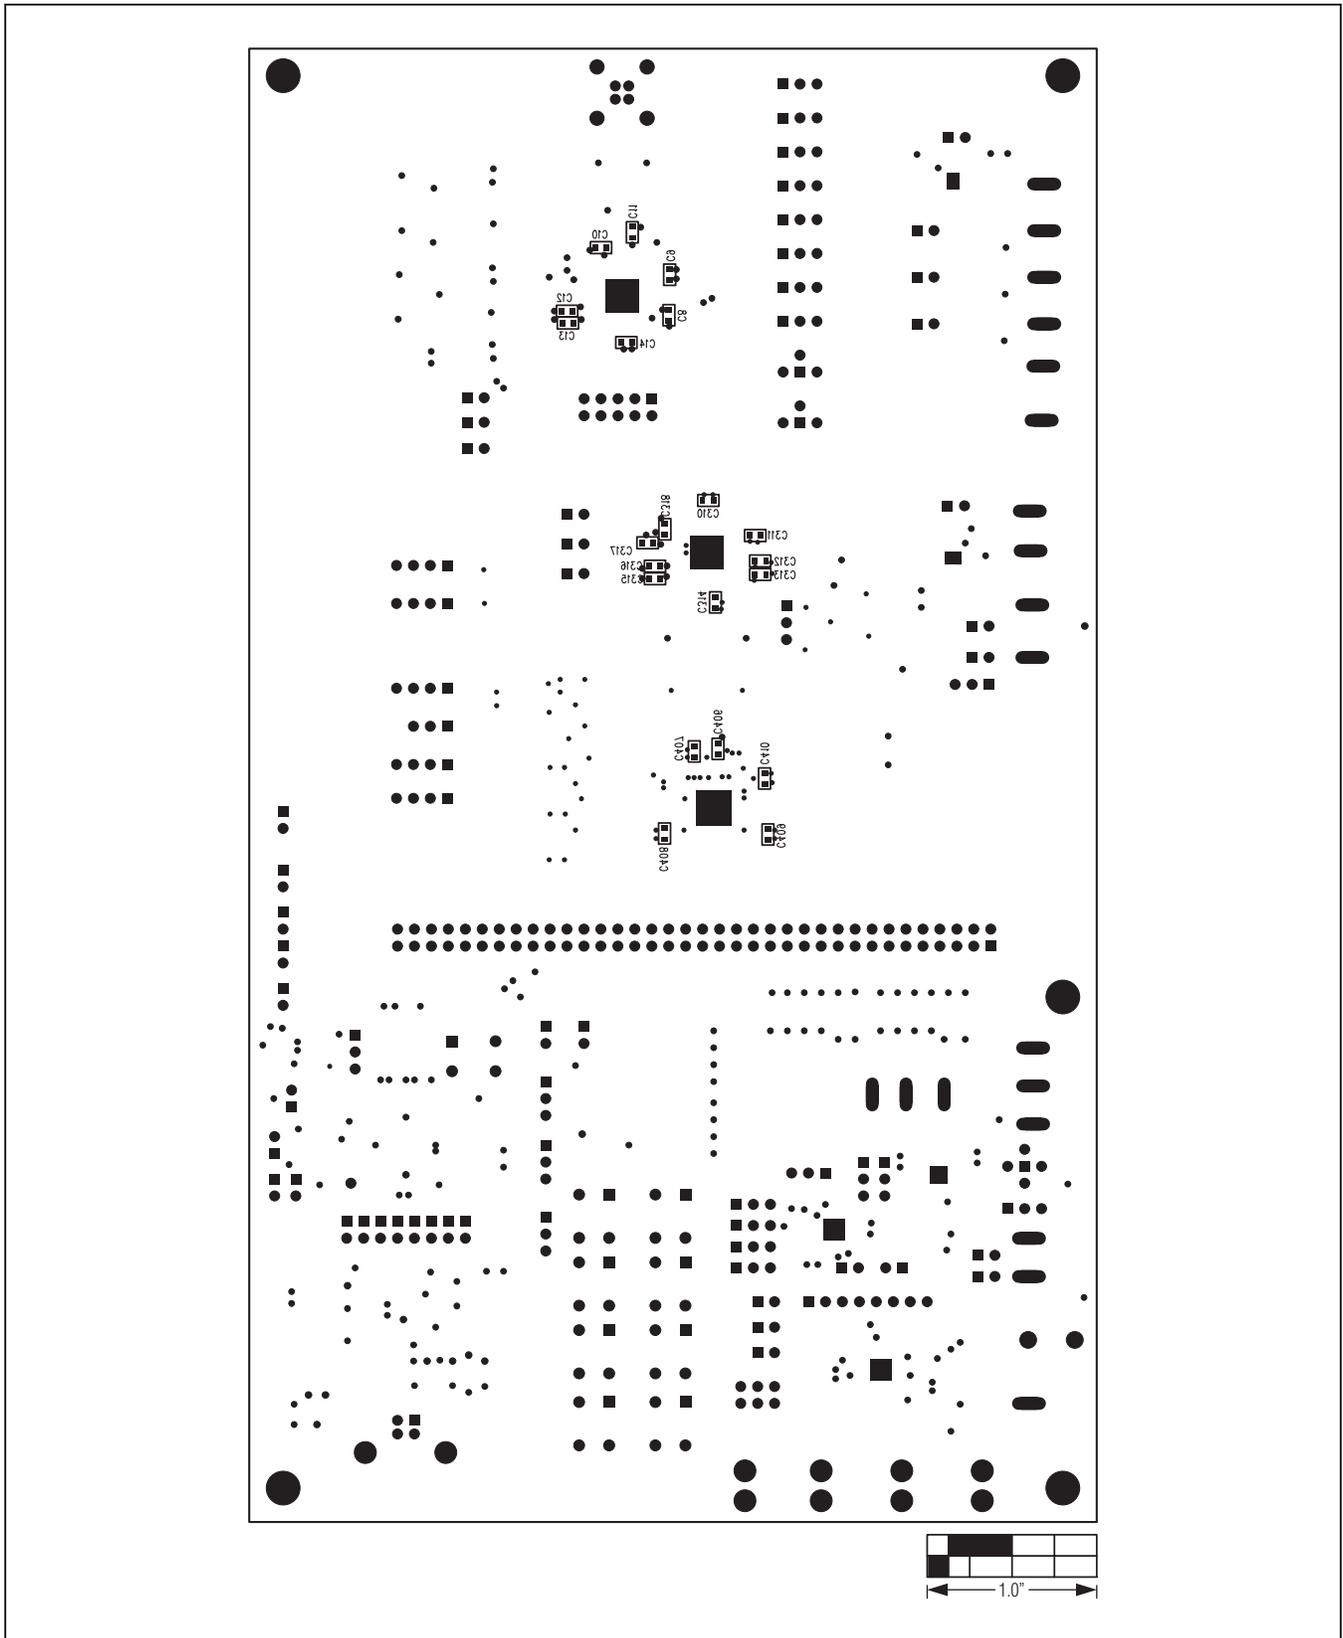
MAX9266 EV Kit Component Placement Guide—Solder Side
